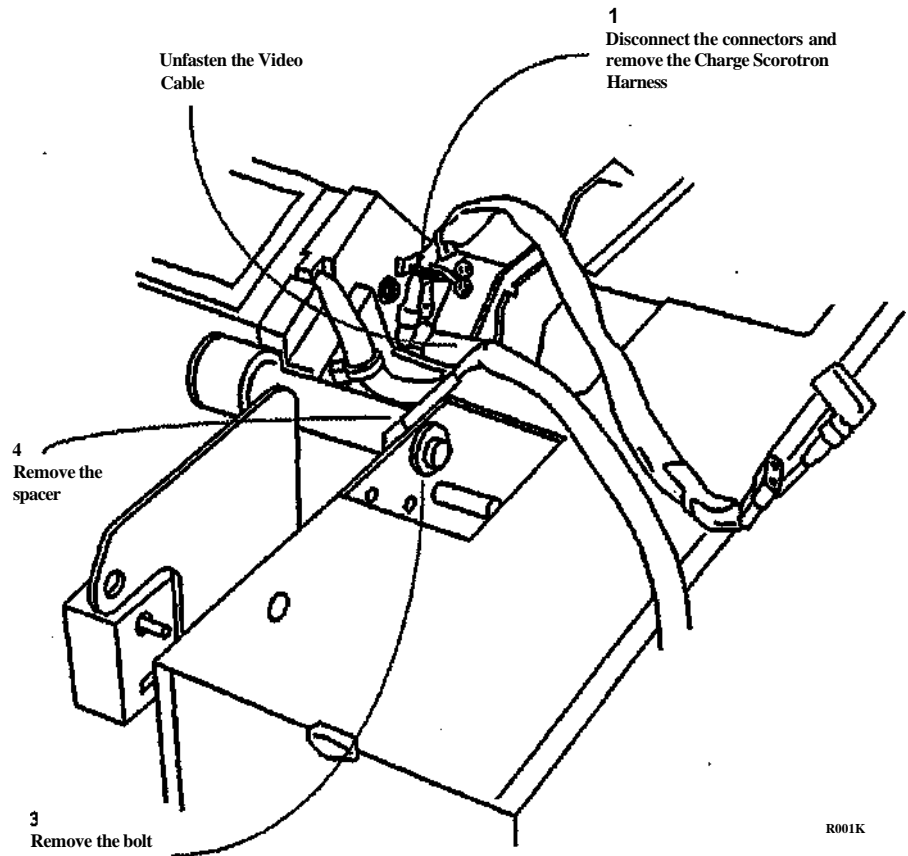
Preparing to Remove the Image Module Assembly (View looking at the Rear from the Right Side)
